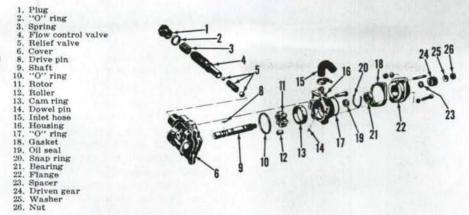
Exploded view of power steering pump. Flow control valve (items 4 and 5) is serviced as a complete unit only.
